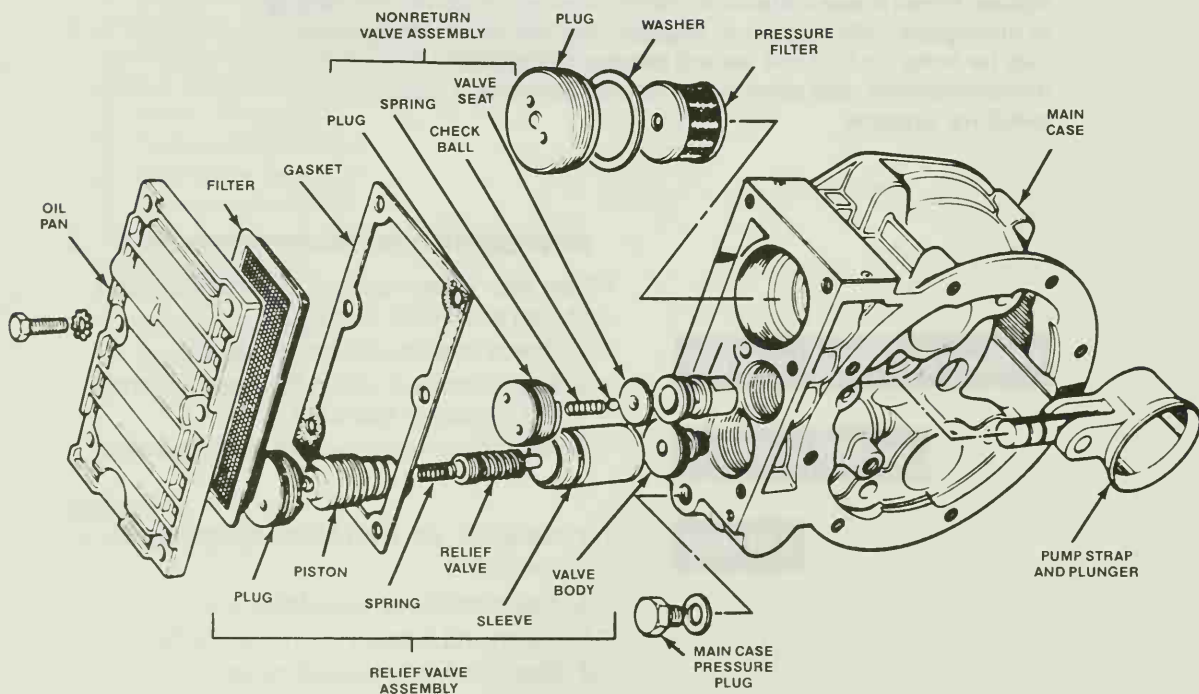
Exploded view showing oil pan, filter and pressure filter. (American Motors Corporation)
